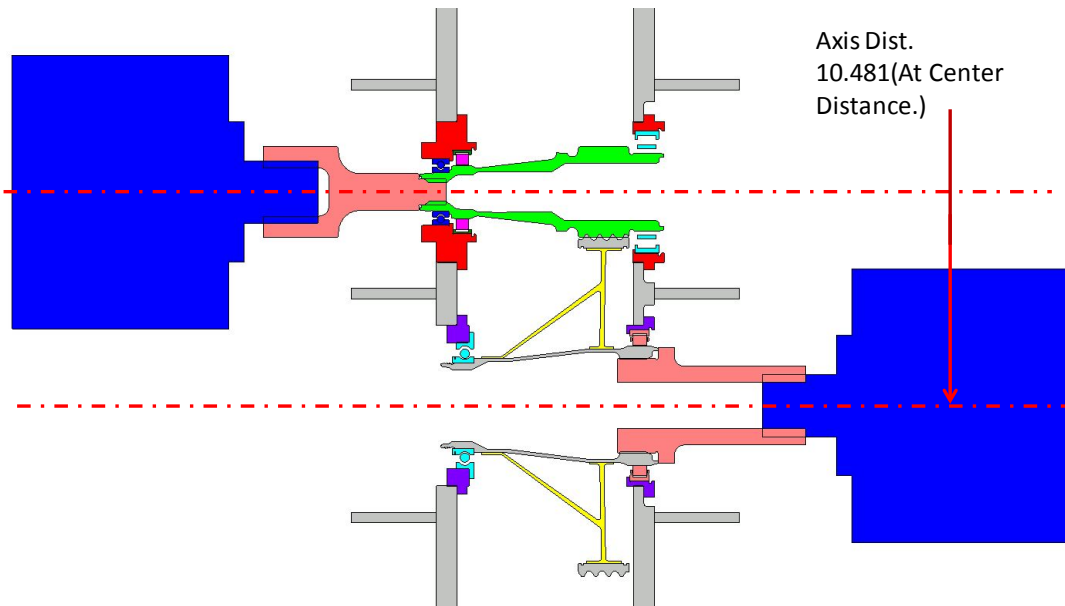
Parallel Axis Power Gears Test Stand (Section Cut).
